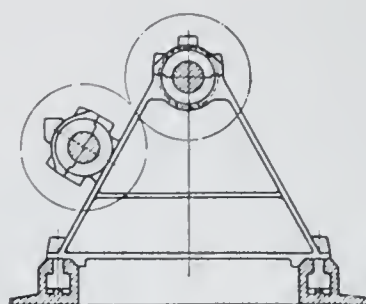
Section Through Driving Shafts, on Line *AA* of Fig. 1.
